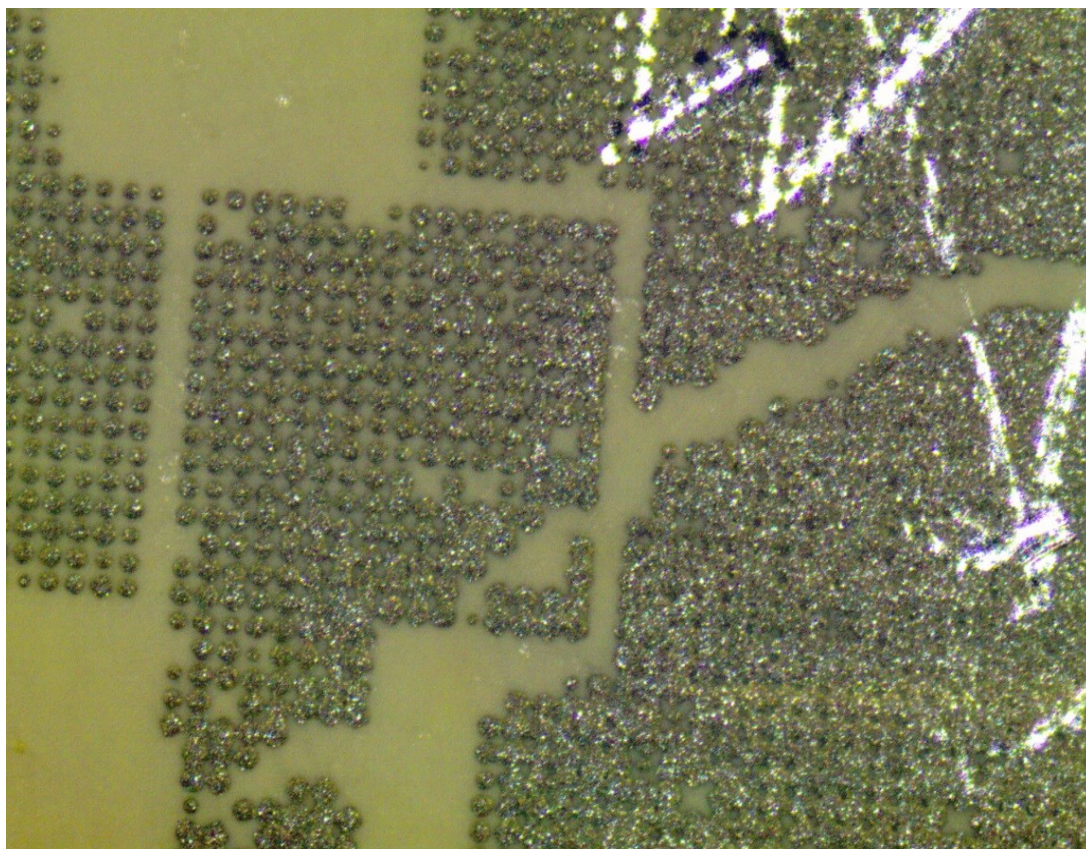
Example of a device printed through the defective 80 μm pattern.
